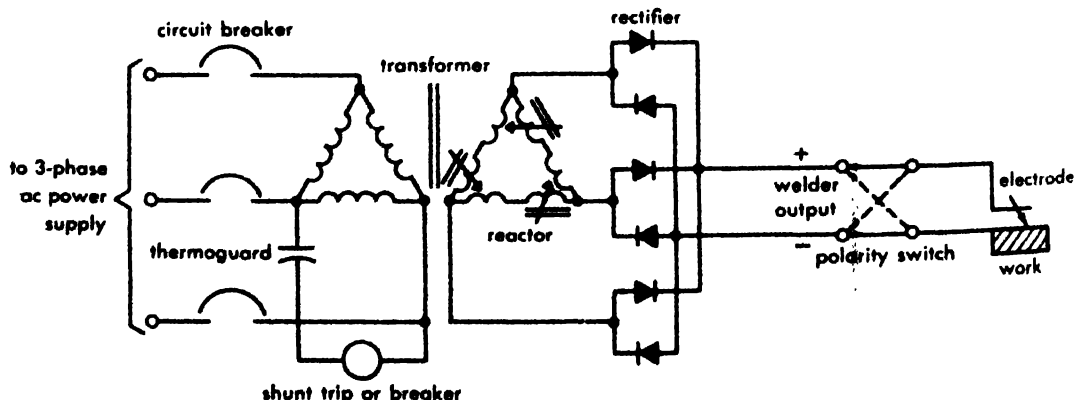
Schematic diagram of rectifier-type arc welder.
